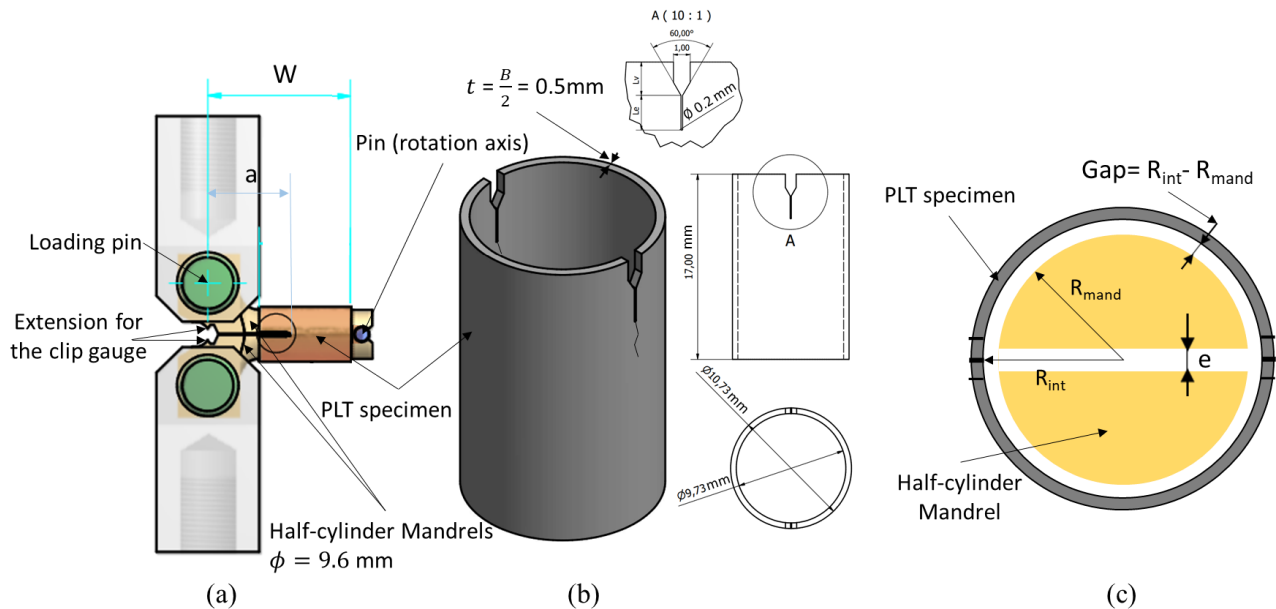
Design of (a) loading fixture (b) PLT specimens (c) Side view of mandrels inserted in the PLT specimen (*Gap* induced by ΔR between mandrel and internal surface of PLT specimen and e induced by EDM while separating the full cylinder in 2 halves)
